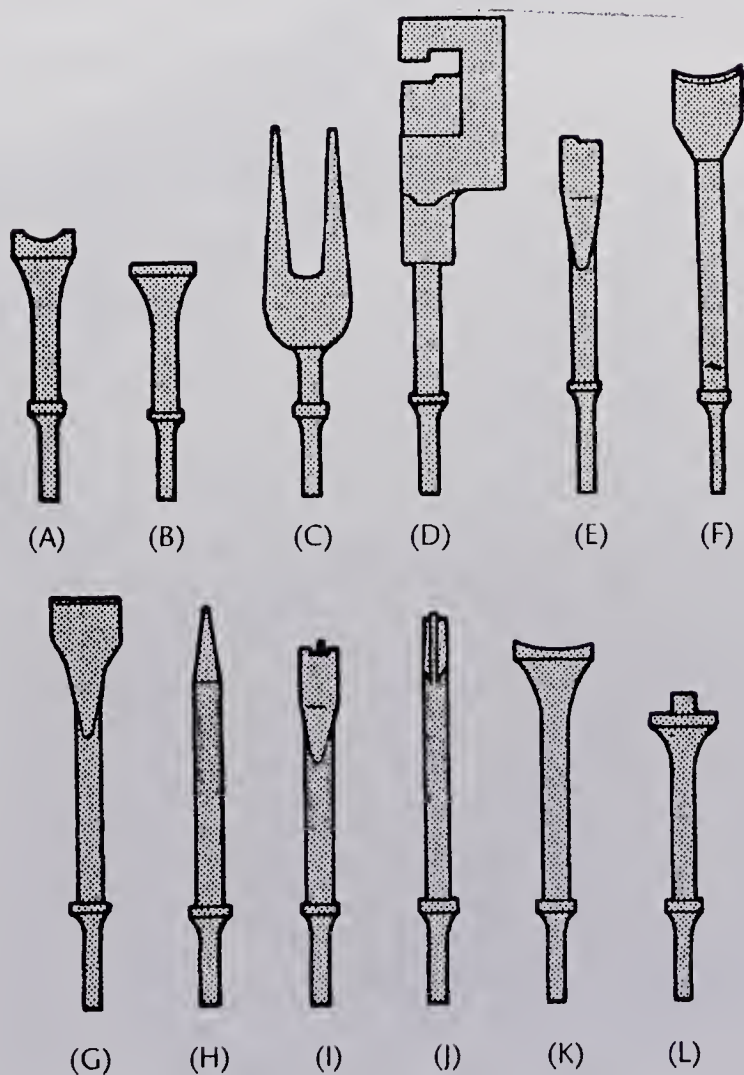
Air chisel accessories: (A) universal joint and tie-rod end tool, (B) smoothing hammer, (C) ball joint separator, (D) panel crimper, (E) shock absorber chisel, (F) tailpipe cutter, (G) scraper, (H) tapered punch, (I) edging tool, (J) rubber bushing splitter, (K) bushing remover, and (L) busing installer.
